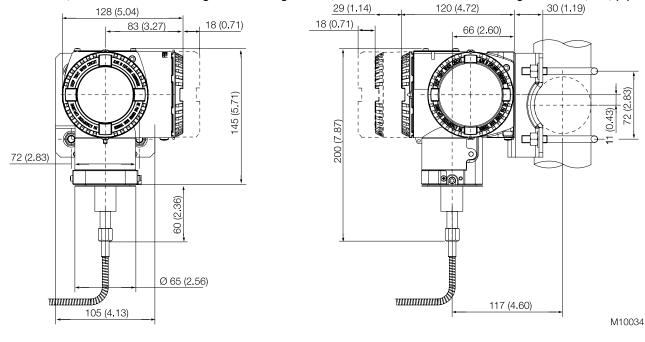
Dimensions - Barrel housing with flush mounting bracket for vertical or horizontal mounting on 60 mm (2 in.) pipe
